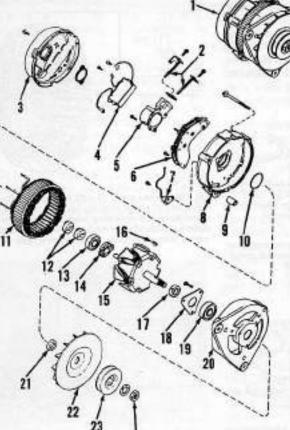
Exploded view of heavy duty Lucas alternator used on models having cab or high electrical requirements.
